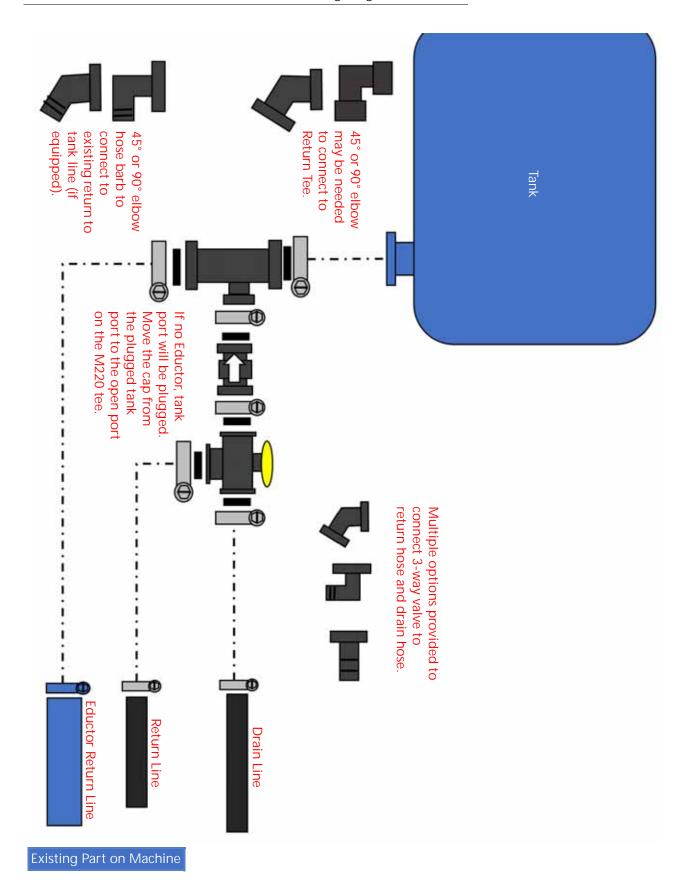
Eductor Tee and Check Valve Assembly Installation for Tank Mounting Location
